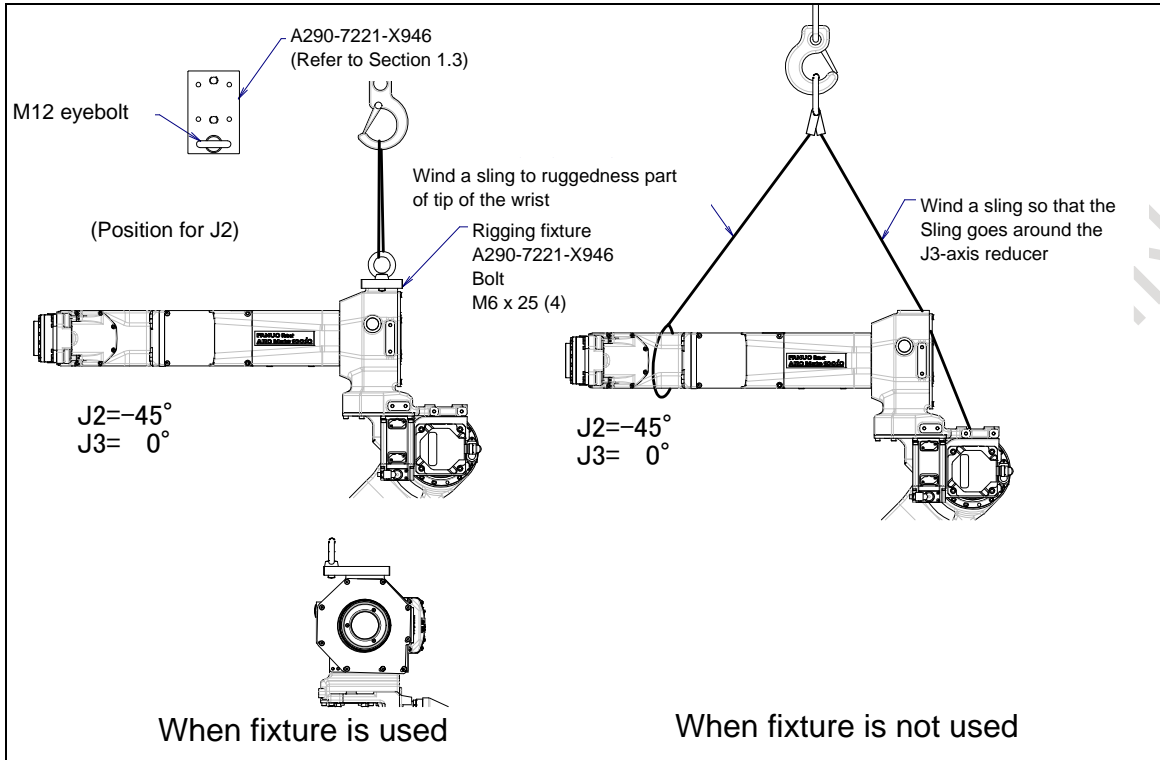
(a) Sling to the J2 and the J3 arm
